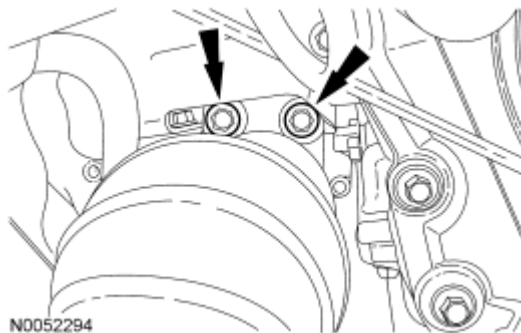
Locating RH Halfshaft Bearing Support Bracket Bolts
